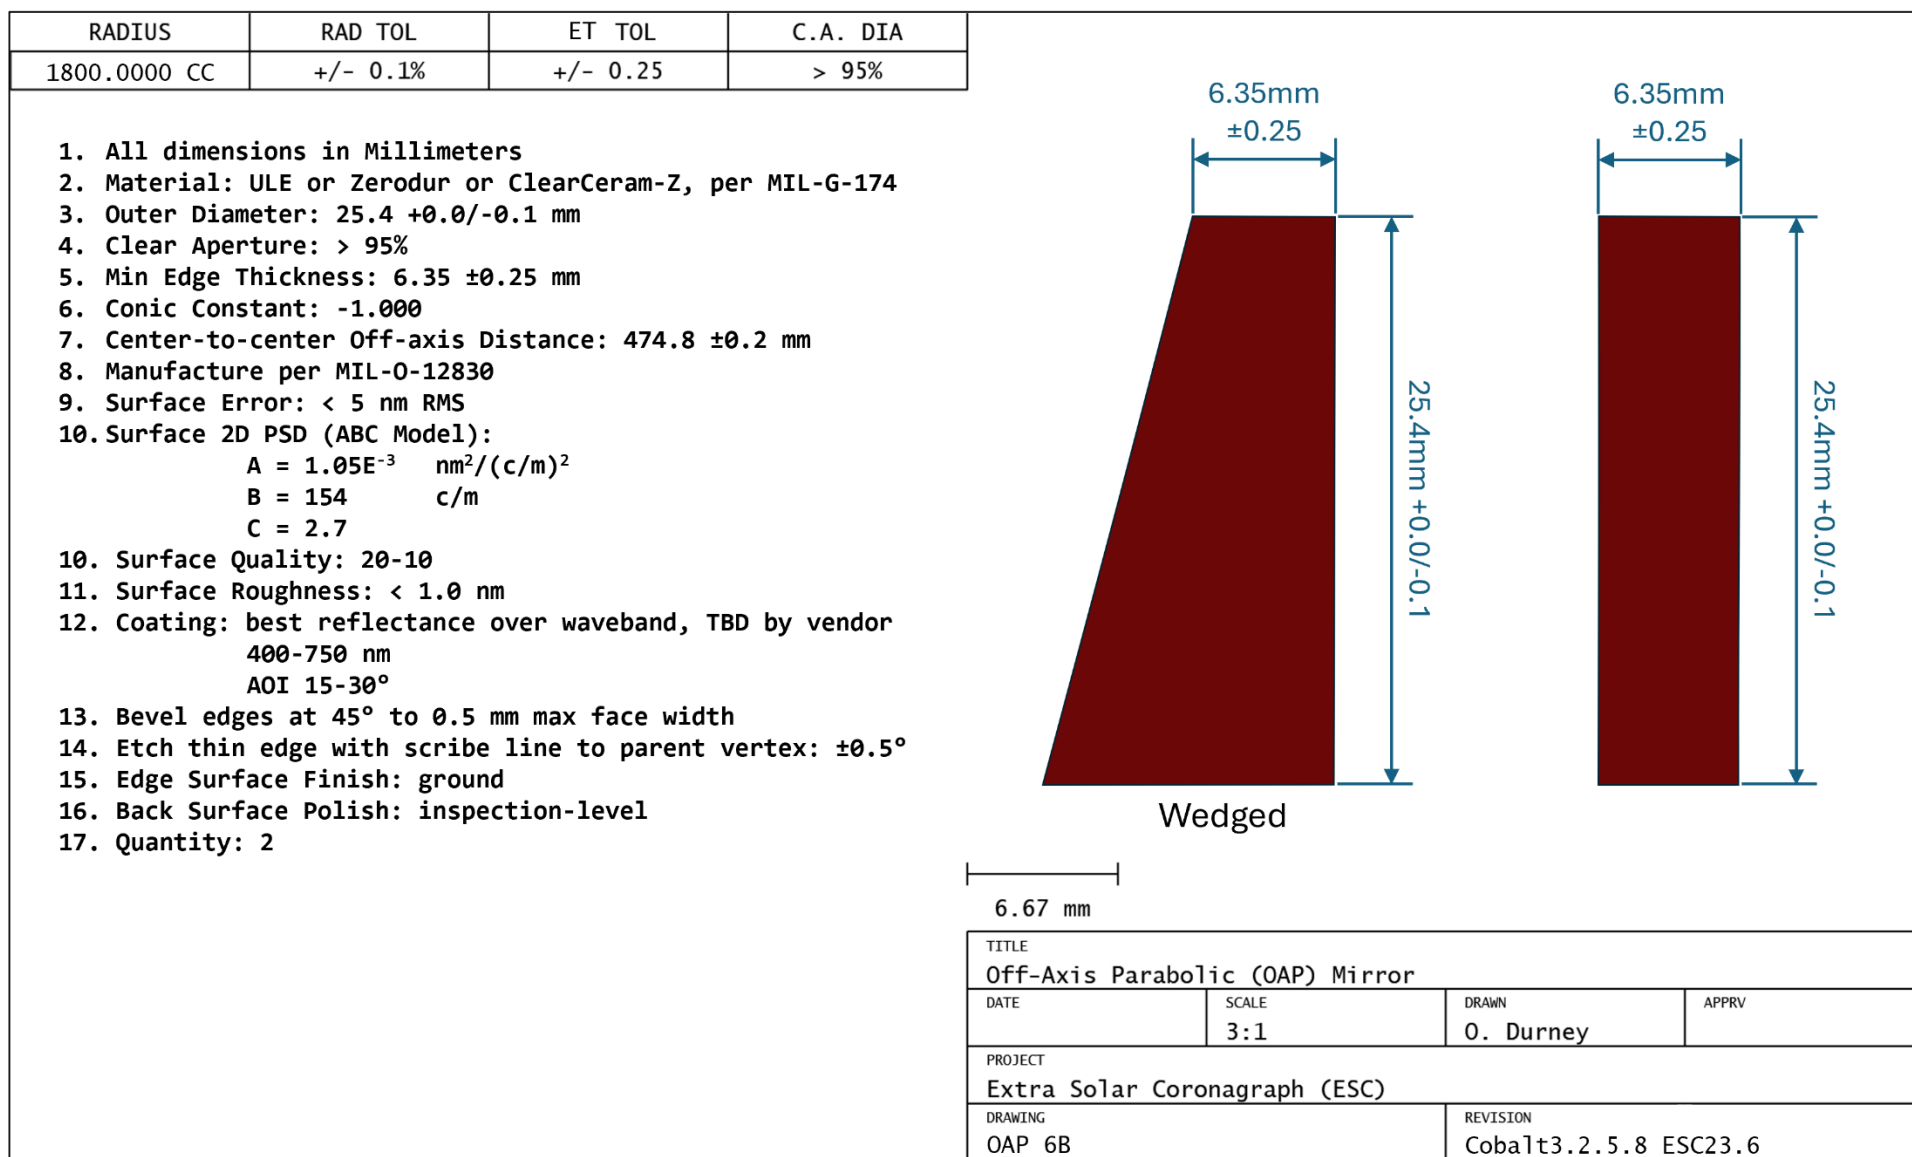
Off-axis parabolic mirror, OAP 6B drawing
